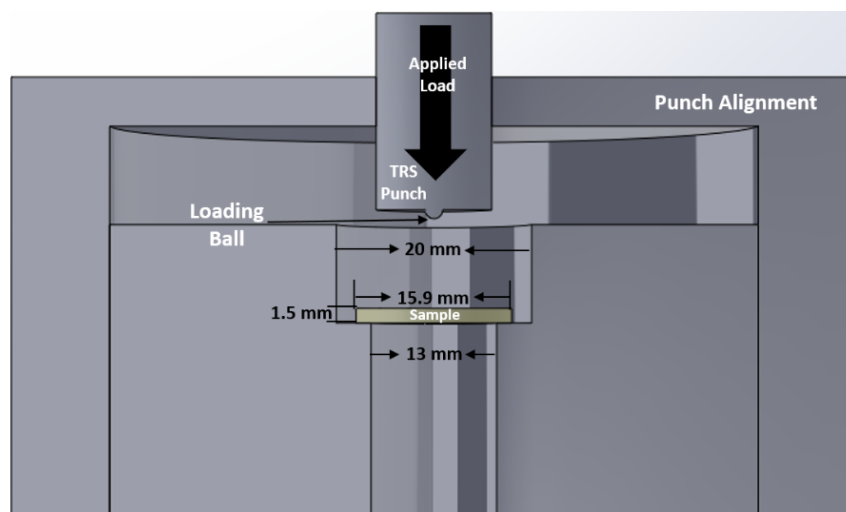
Cross-sectional schematic of TRS test fixture for right cylindrical samples.
